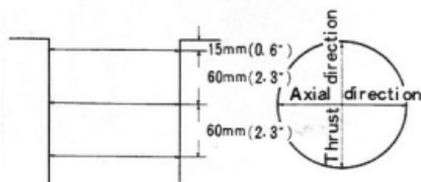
Measuring Points X0313 of Cylinder Bore
